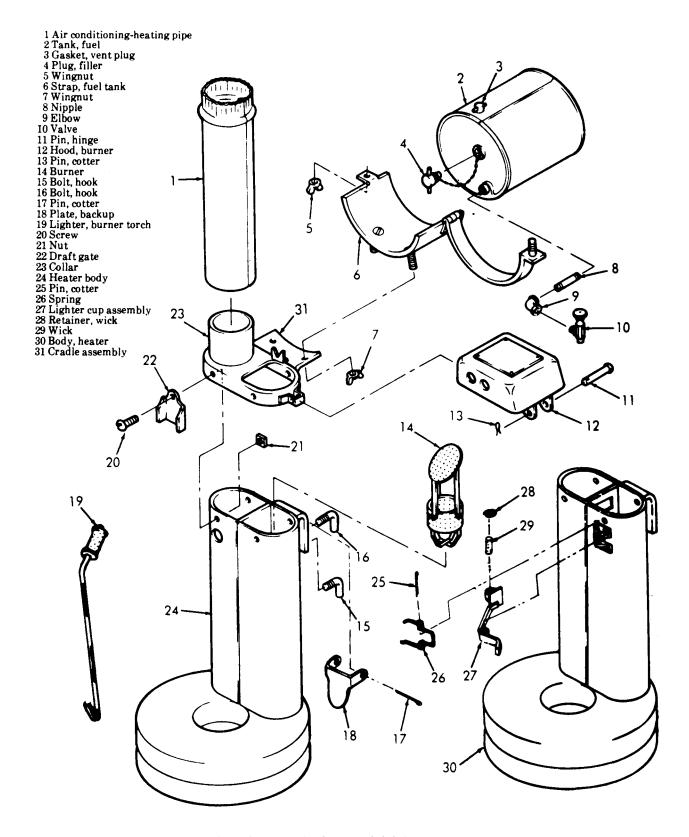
Immersion heater-exploded view (FSM 4540-266-6835) (Model 447-2EX).
